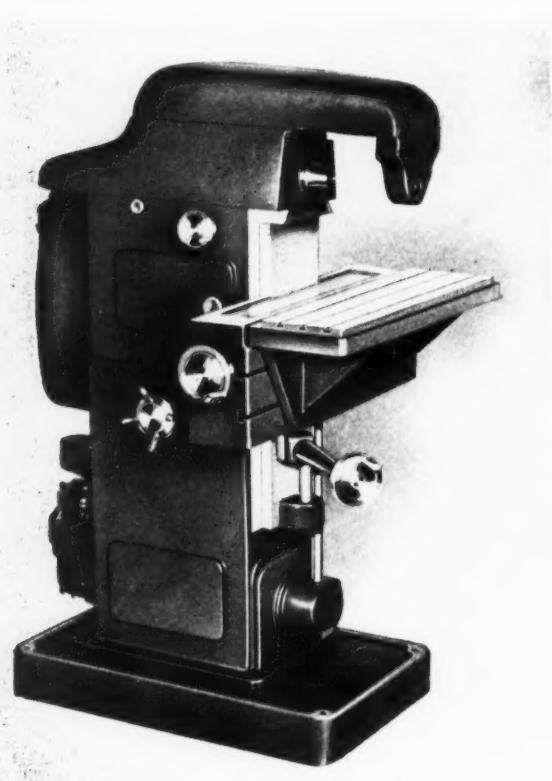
Portman Milling Machine with Right-angle Work-table and Arbor Support
